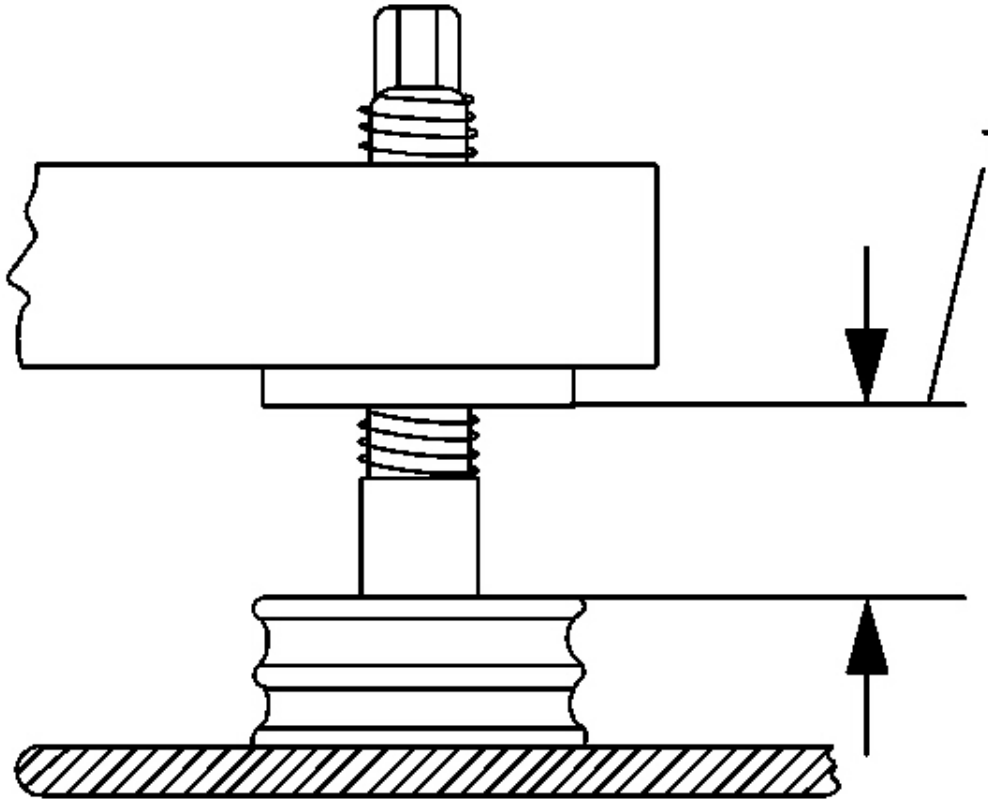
Measuring & Adjusting The Front Spring Adjuster Bolt Gaps
